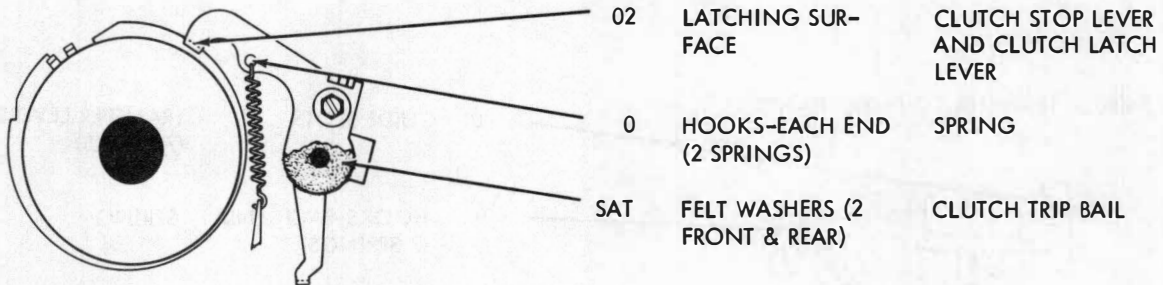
C. Keyboard MX-1114C/UG or MX-1677A/UG Lubrication — Clutch Trip Bar, Transfer Lever, and Contact Box Mechanisms
